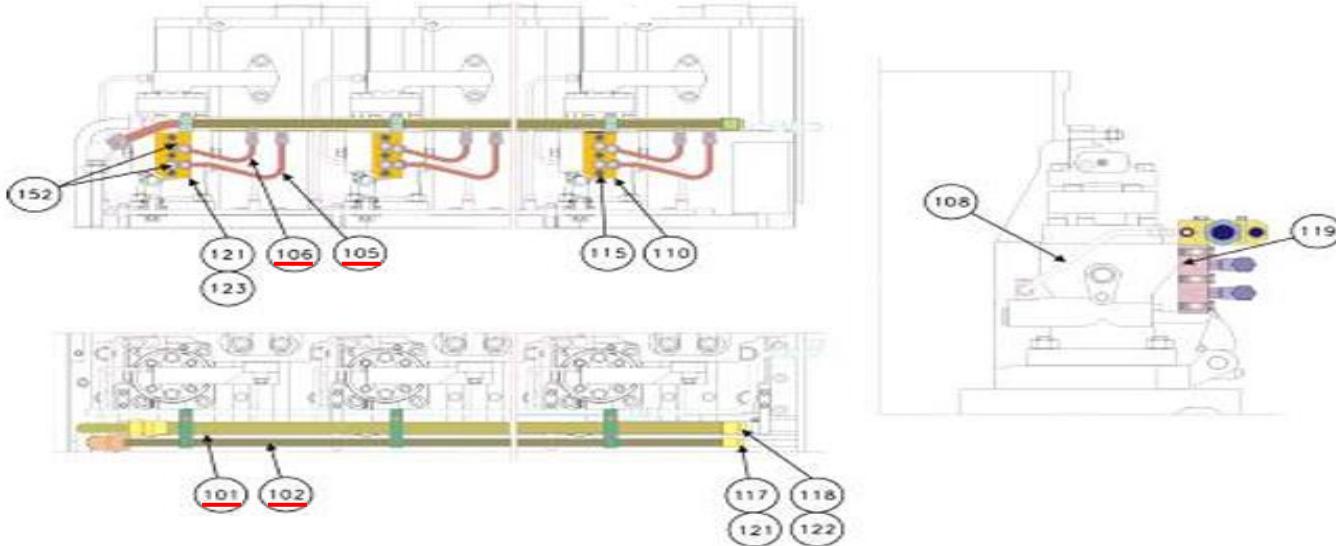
Loosen the bolts for high pressure pipe block and fuel injection pump
